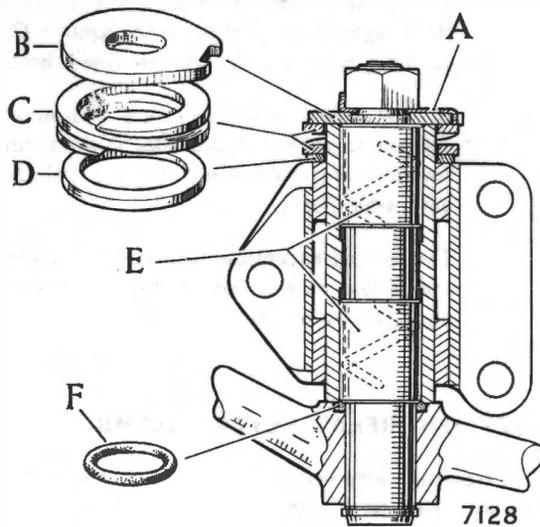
Cross section view through steering relay lever assembly, note the position of the lubrication groove in the bush bearings.
